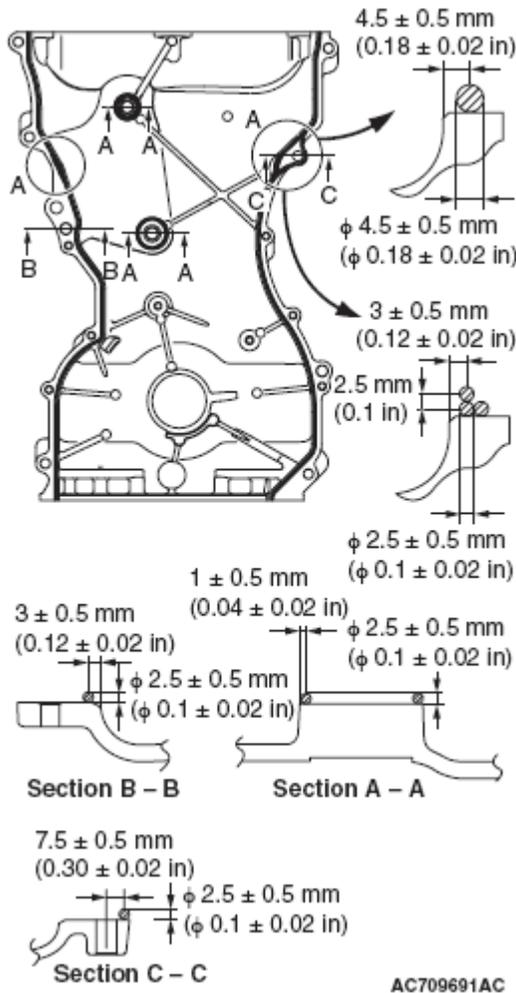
Identifying Timing Chain Case Assembly Gap Dimension
